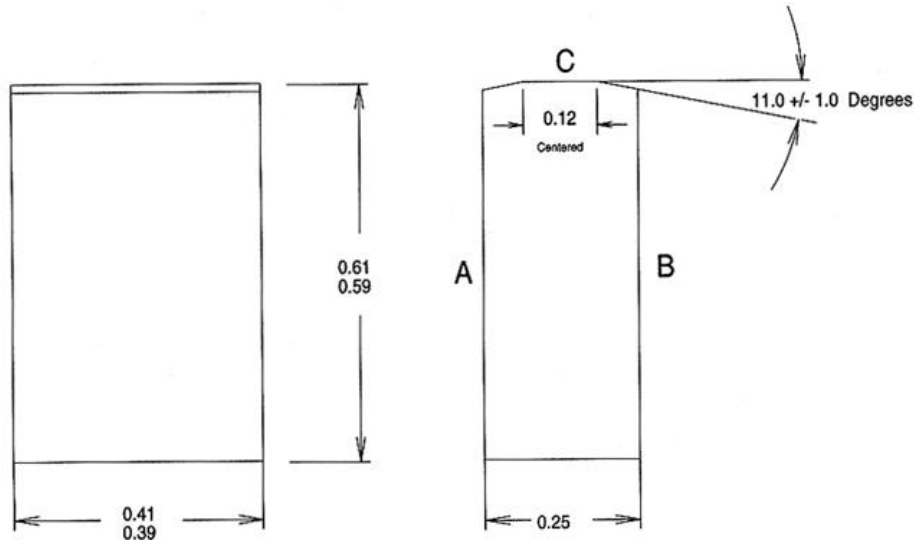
Drawing of the 0.12-inch fretting pin configuration (Dimensions in inches).
